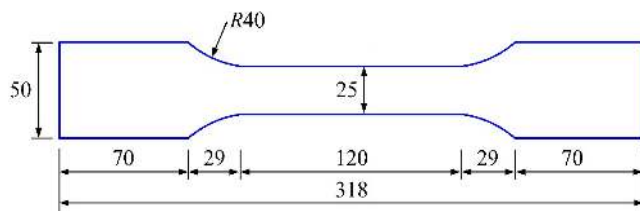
Dimensions of tensile coupons (dimensions in mm)
